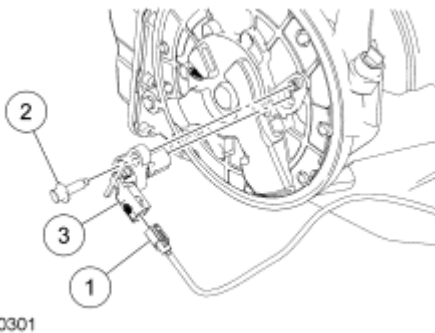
Identifying Turbine Shaft Speed (TSS) Sensor
